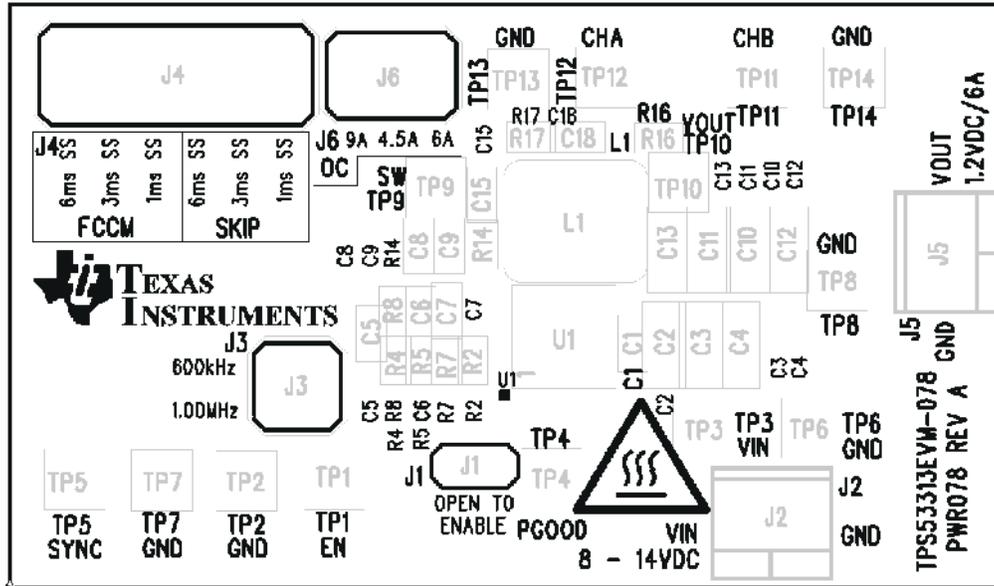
TPS53313EVM-078 Top Layer Assembly Drawing (top view)
